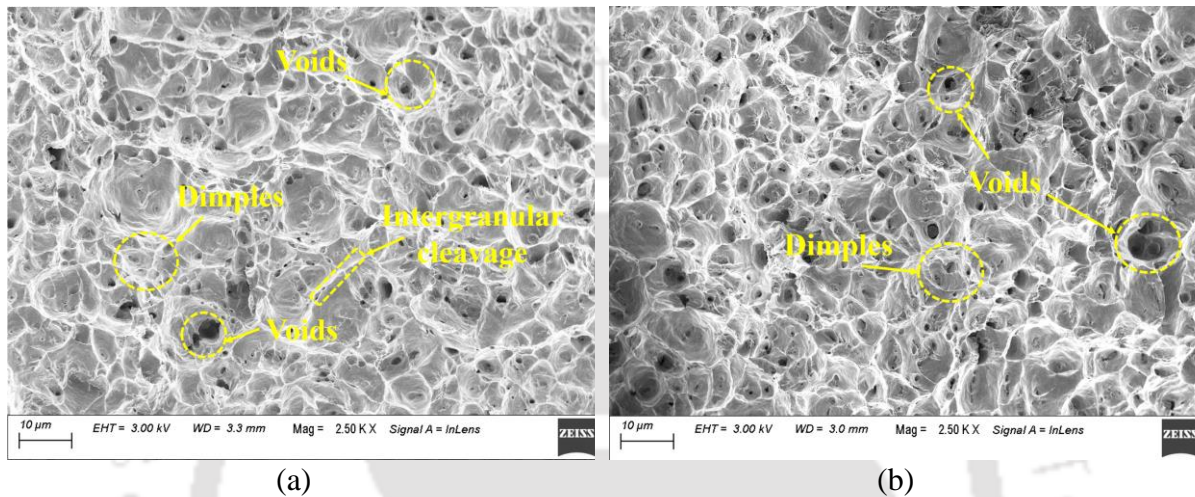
Fracture surface morphology of low carbon steel for Exp-5 (a) Without CMF, and (b) With CMF
